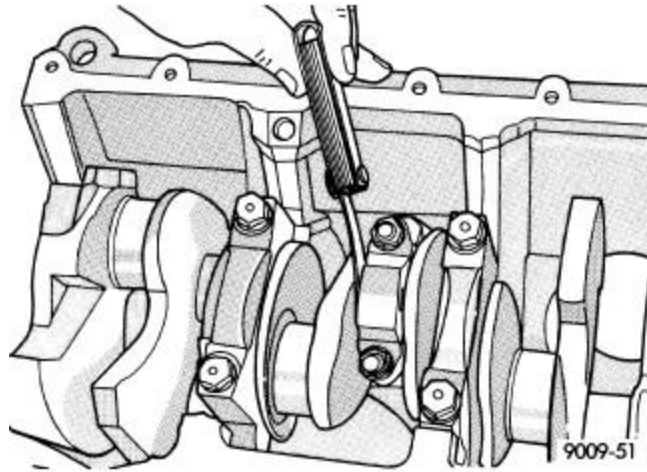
Measuring Gap Between Connecting Rod & Crankshaft Journal Flange
